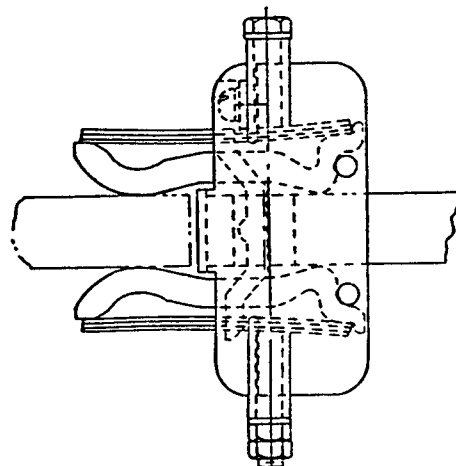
B. Primary disconnect assembly (for AKT-50), Ref. No. 220A.
